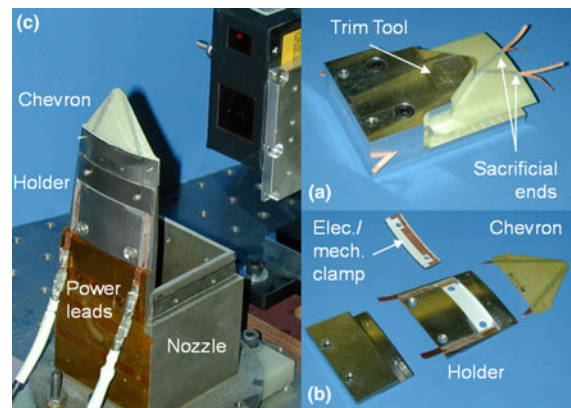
Single chevron assembly: (a) machining to net shape; (b) mechanical/electrical connections; (c) bench-top/flow test apparatus
